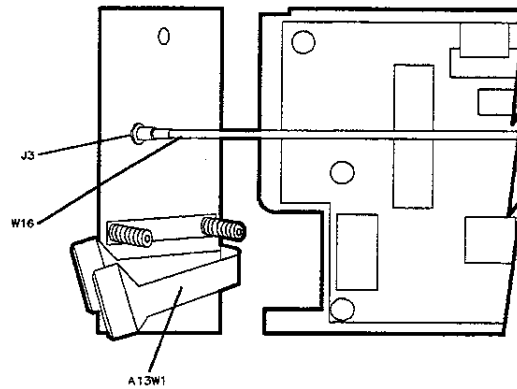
Overall Parts Identification Drawing, Rear Panel (1 of 3)
